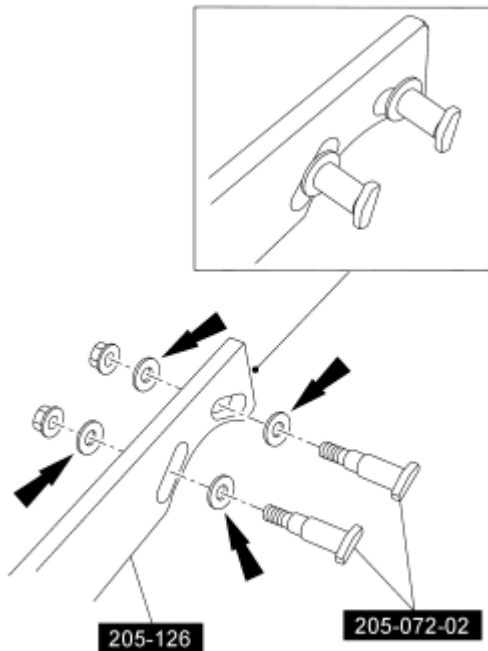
Assembling Special Tools (205-126 And 205-072-02) And Hardened Washers
